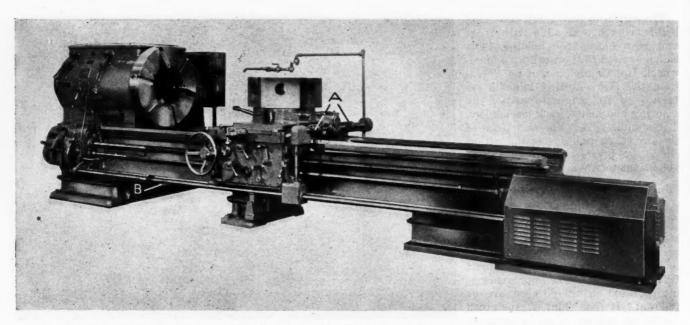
Hydratrol Lathe Equipped with Automatic Turret-feed Regulator and Automatically Positioned Feed-stops
